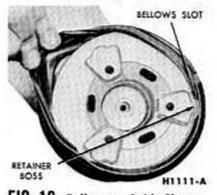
Bellows to Guide Sleeve and Retainer Installation
